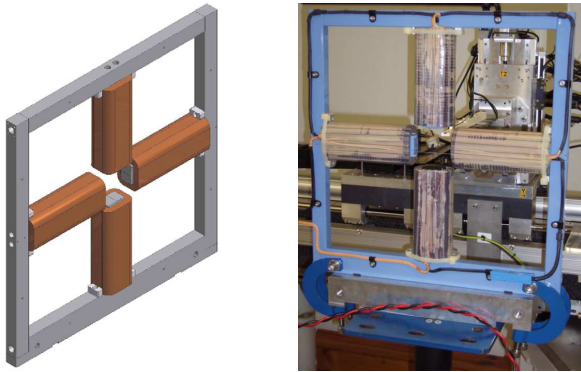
CAD drawing and photo of the skew quadrupole corrector.
